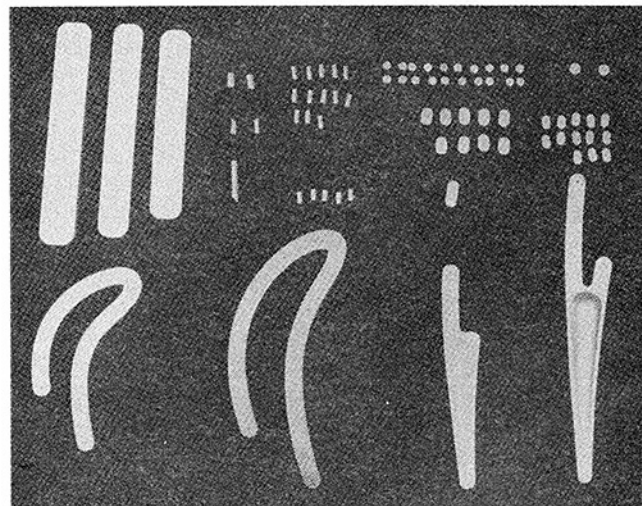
Second-stage nozzle manifold covers and plugs required for a single nozzle
